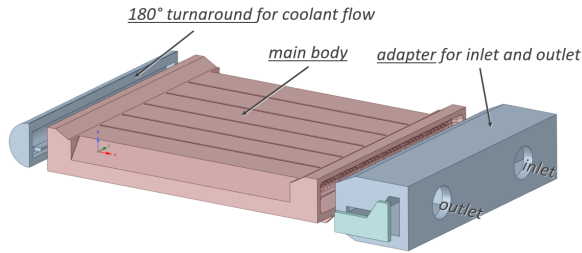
Assembly of the 3 parts of the HiCANS HBS Target: 180° turnaround for coolant flow, main body and adapter for inlet and outlet
